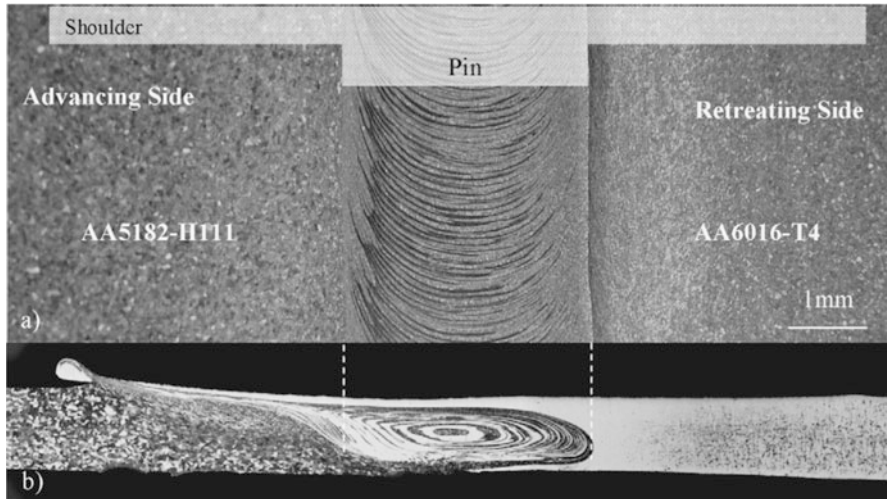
(a) Horizontal cross-section of a dissimilar weld between 5182Al and 6016Al alloys, and (b) transverse cross-section of the same weld showing intercalated layers of the alloys (*brighter* region 6016Al and *darker* region 5182Al) in the onion ring (Leal et al. 2008, reprinted with permission from Elsevier)
